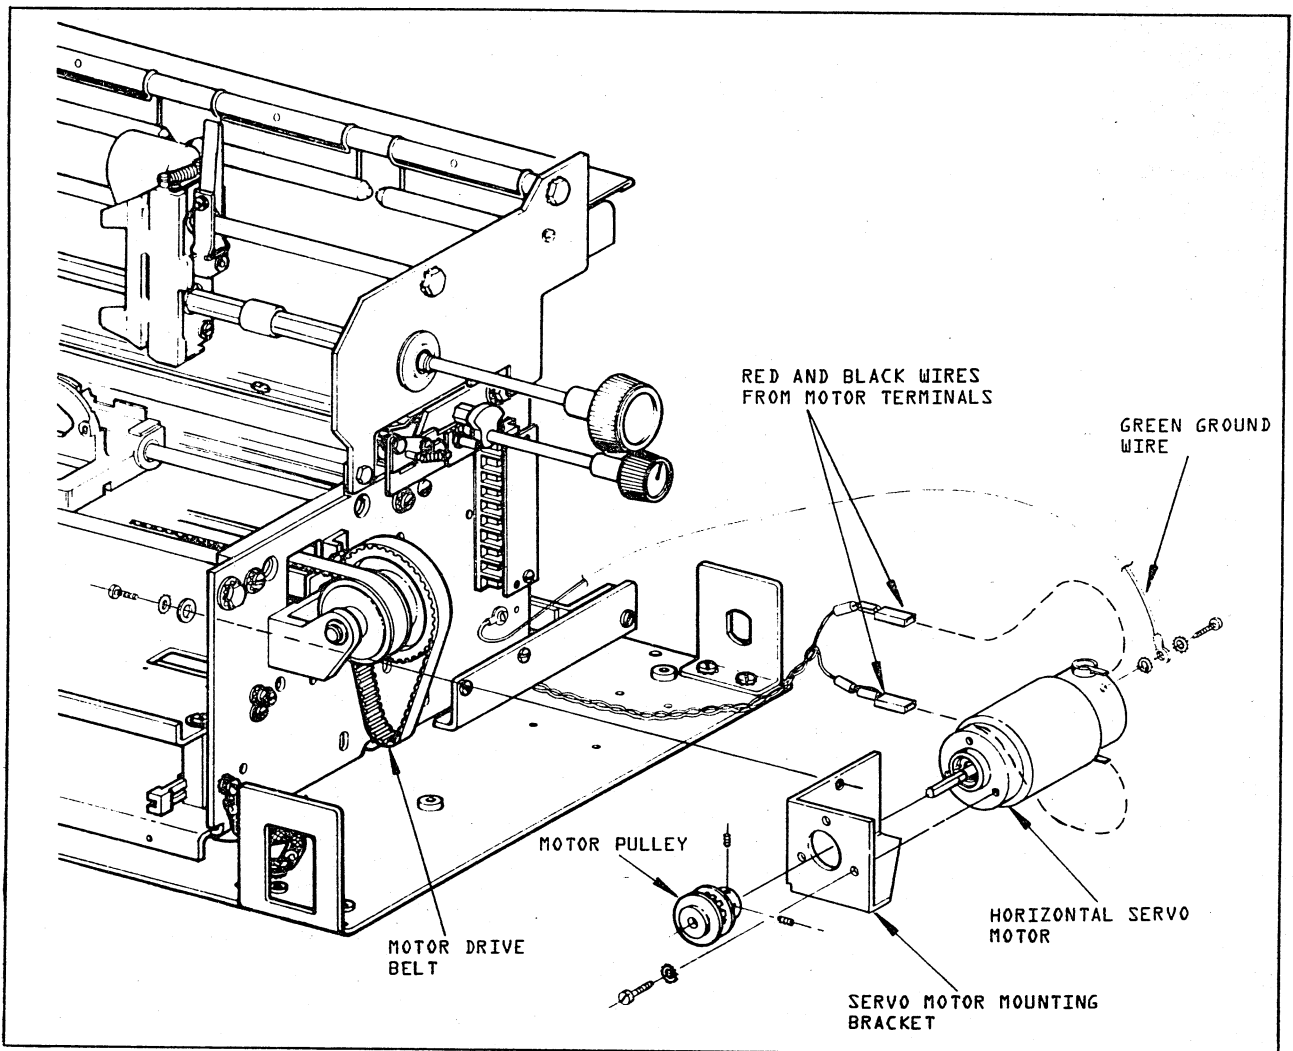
HORIZONTAL SERVO MOTOR REPLACEMENT
